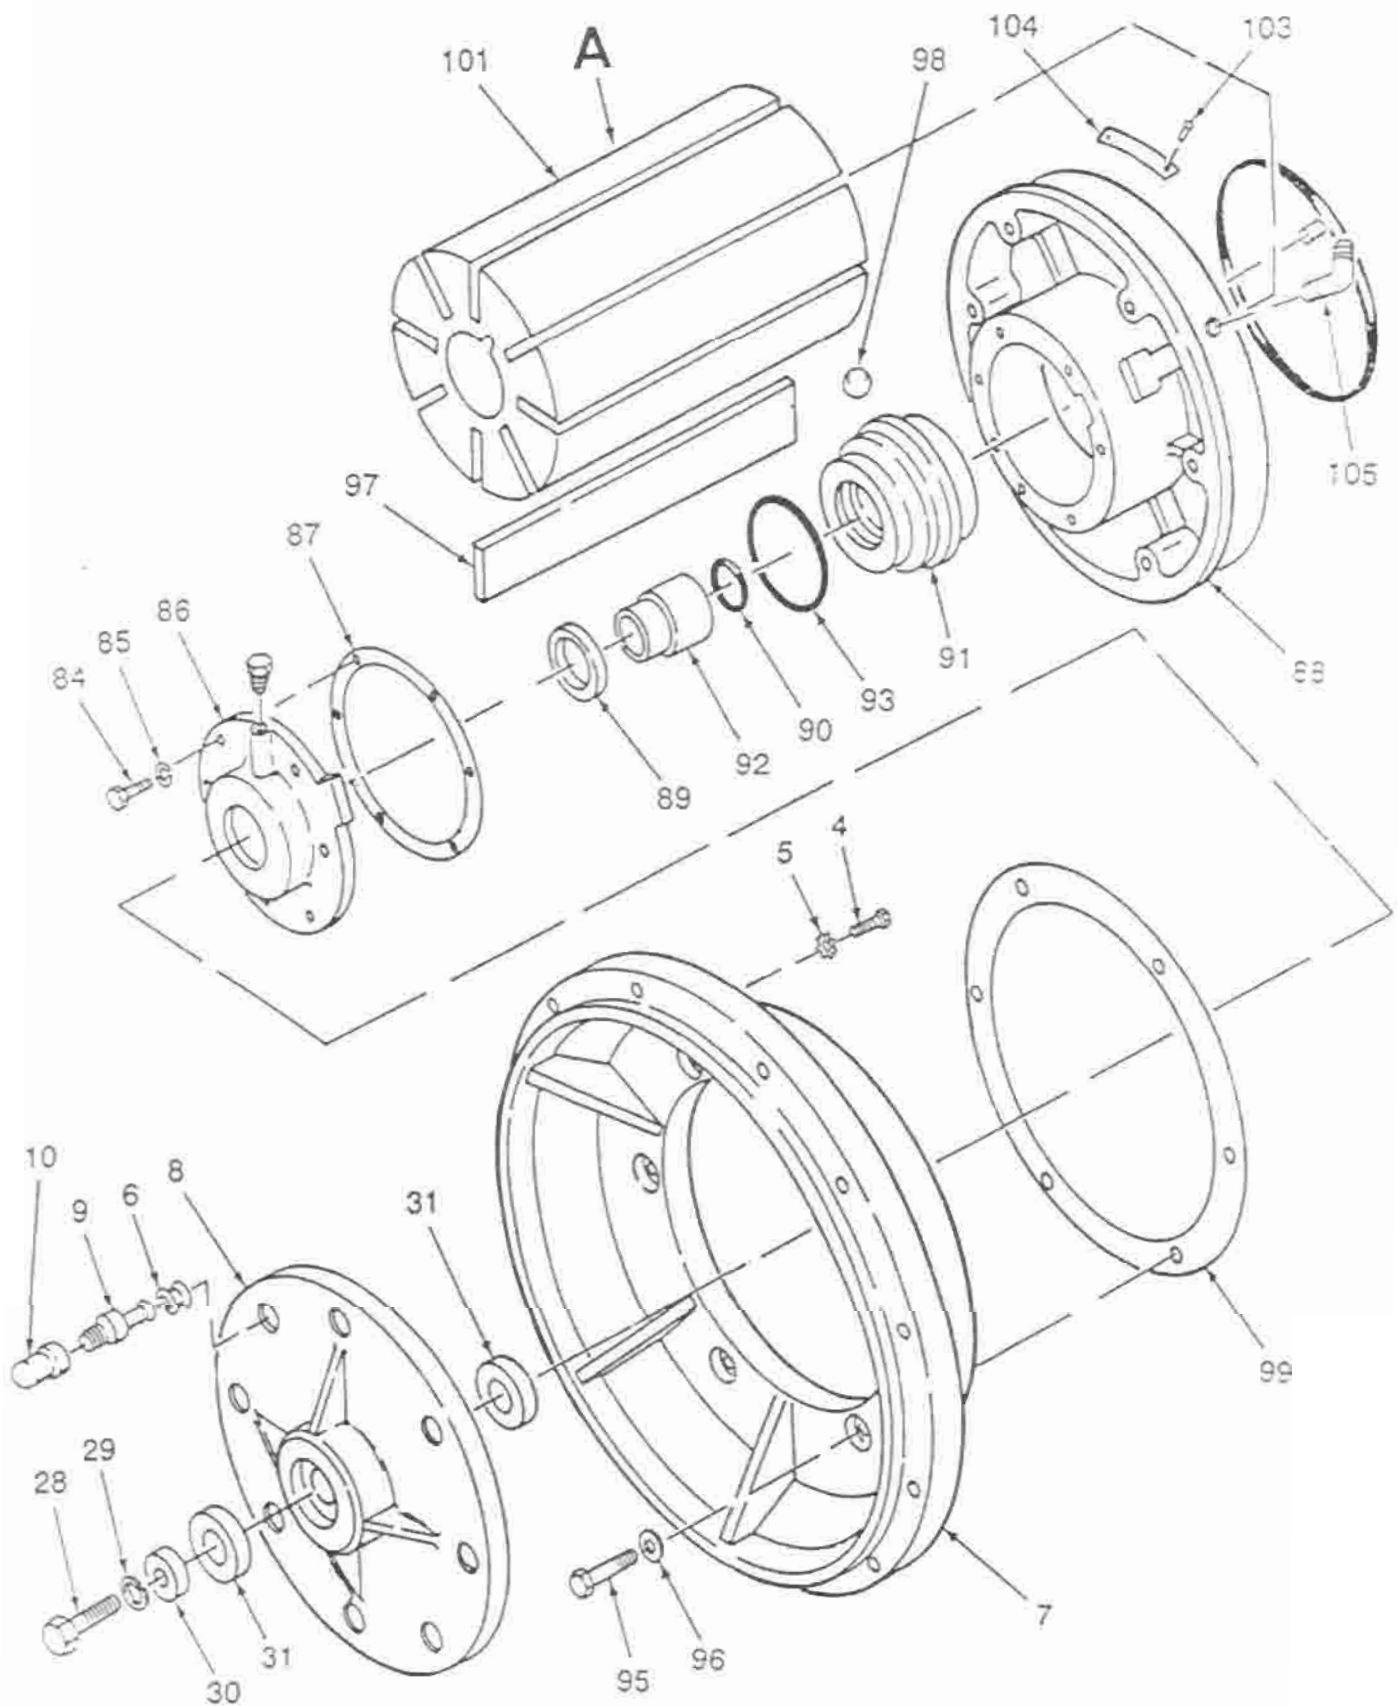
Air Compressor Group Disassembly (Sheet 1 of 4)
